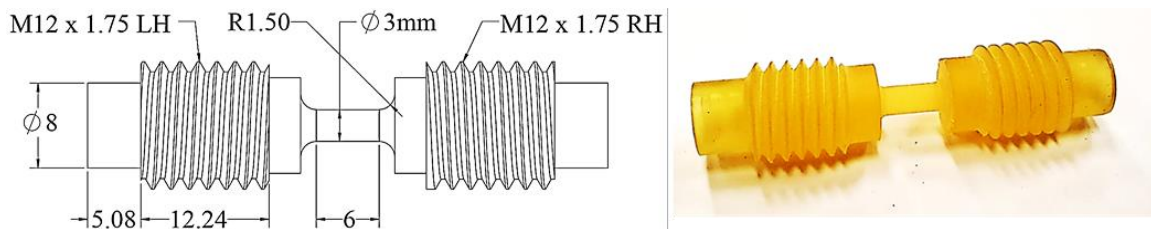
The specimen and dimensions for the T-PSHPB tests.
